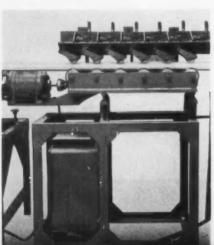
For final cooling of extruded vinyl pipe, it is passed through a water filled cooling tank which is equipped with flexible rubber baffles or seals at each end
